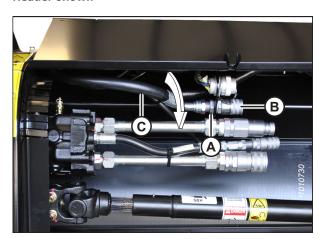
Auger and Reel Pressure Coupler and Hose – 5.5 m (18 ft.) Header Shown
